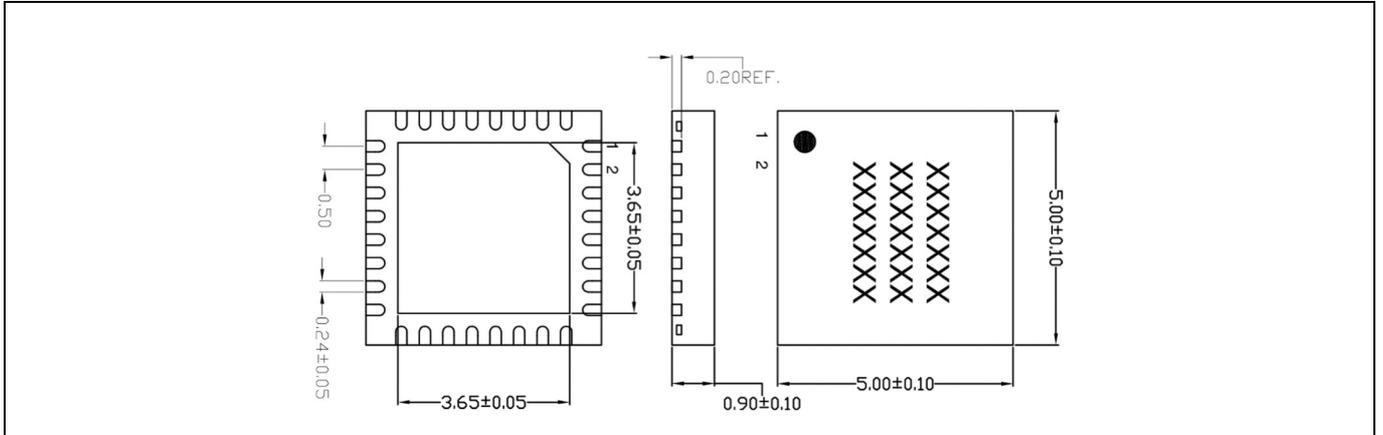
Outline Dimensions of QFN32 Package with Exposed Pad
